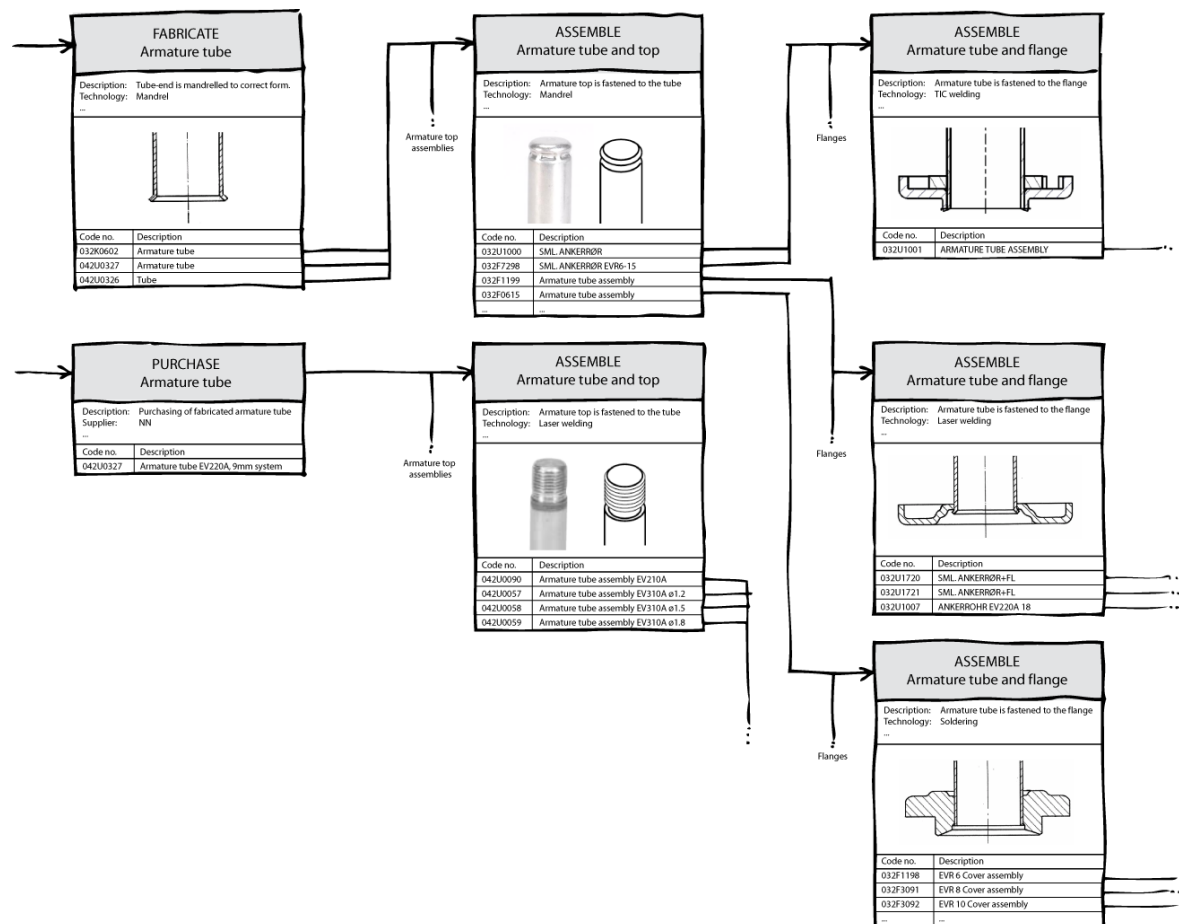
Extracts of the supply chain analysis in the PFMP², which shows the variety of joining technologies used, i.e. laser welding, TIC welding, soldering and screws.
